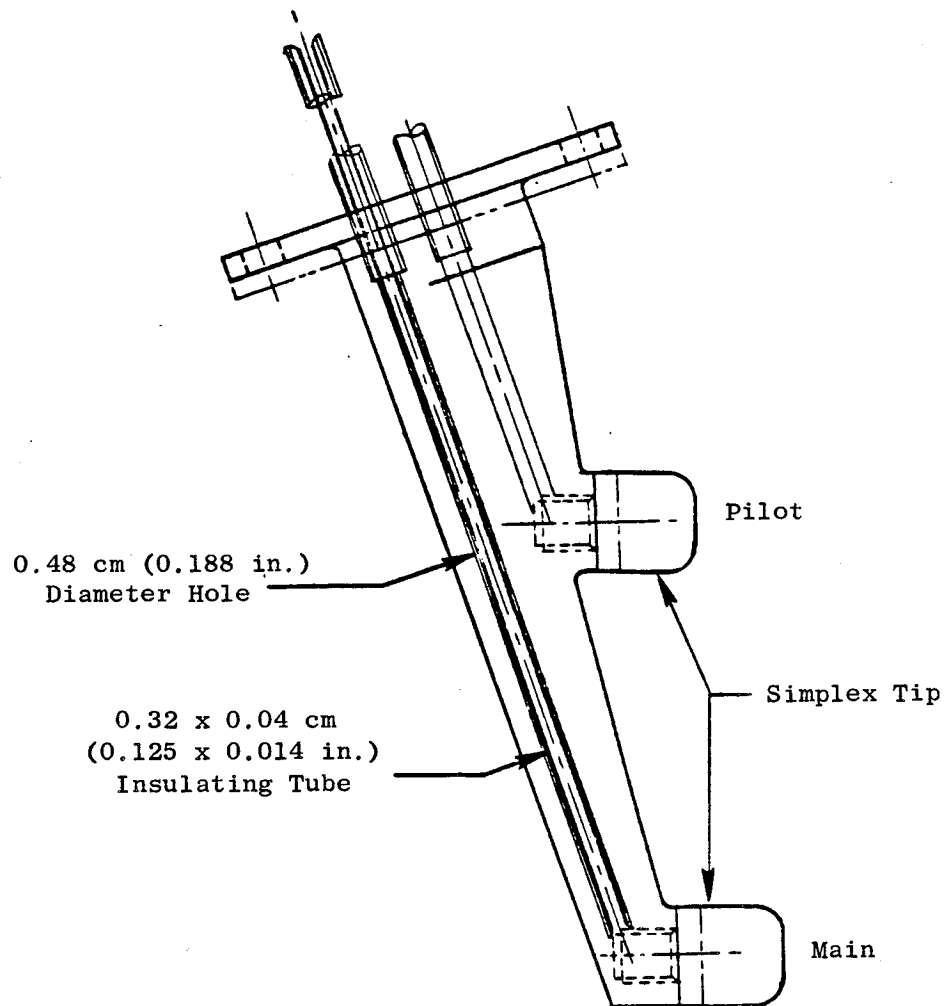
E³ Test Rig Fuel Nozzle Assembly.
